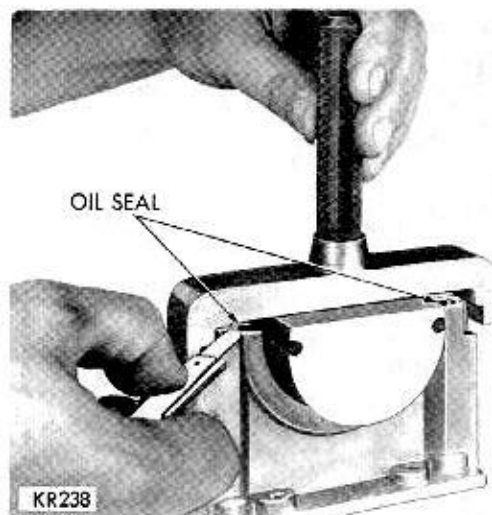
Trimming Rear Main Bearing Lower Oil Seal
